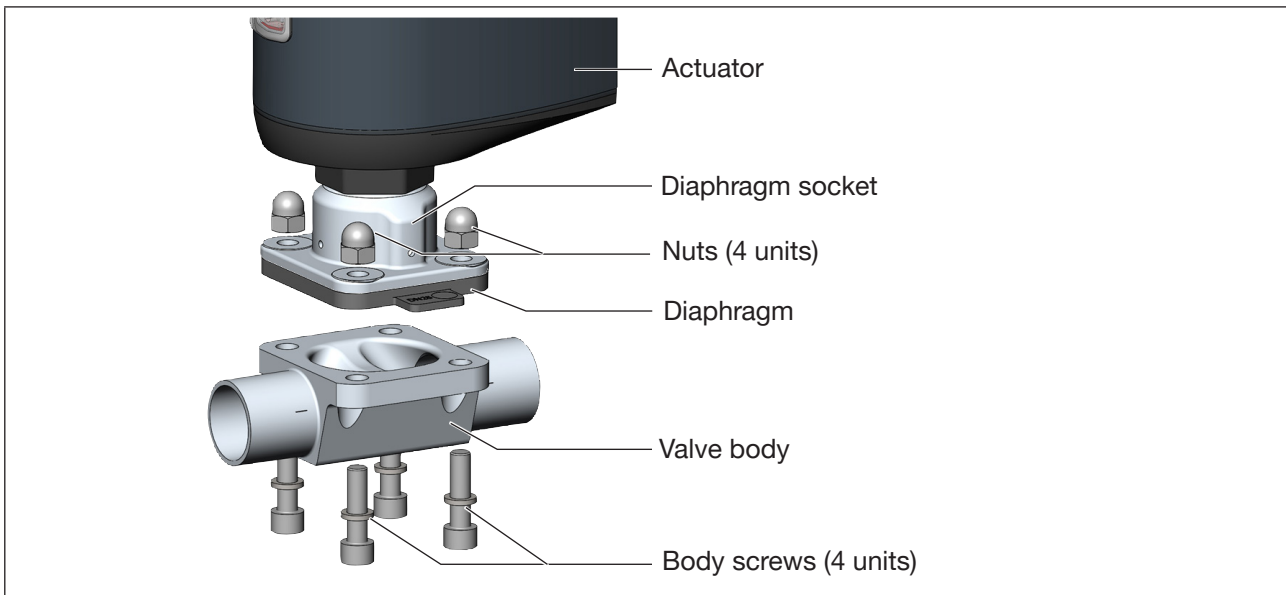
Disassembly of the diaphragm using the 2-way body as an example
